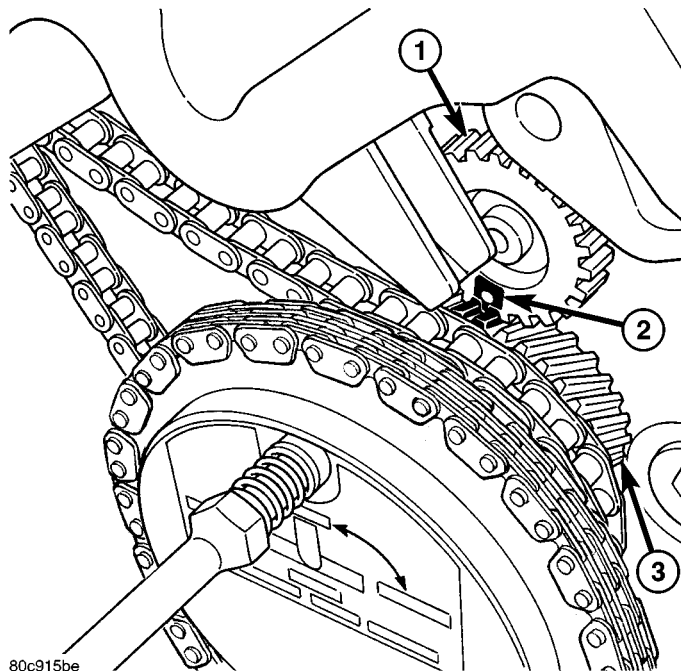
COUNTERBALANCE SHAFT ALIGNMENT MARKS
